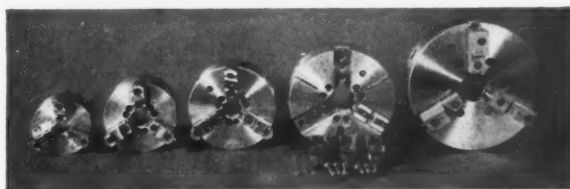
shows a group of the new American Standard Chucks. The chucks illustrated are the 6 in., 8 in., 10 in., 12 in. and 15 in. sizes. The pamphlet referred to below establishes controlling dimensions of all chucks from 6 in. to 36 in. in diameter in both medium-duty and heavy-duty types. Both of these types have master jaws of the tongue and groove type and dimensions have been established making the top jaws inter-
